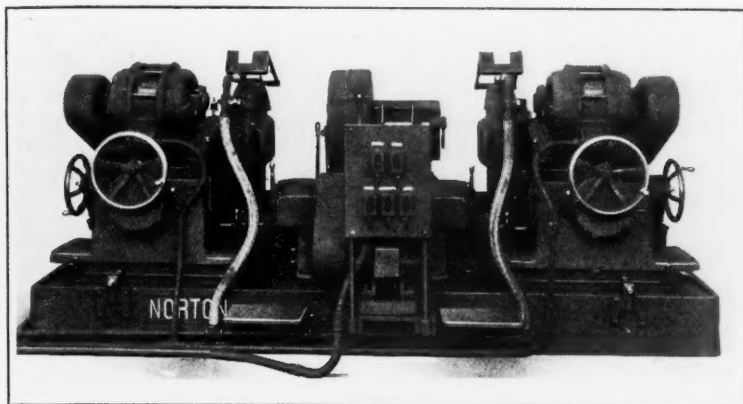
Norton Car-wheel Grinding Machine from Operating Side
